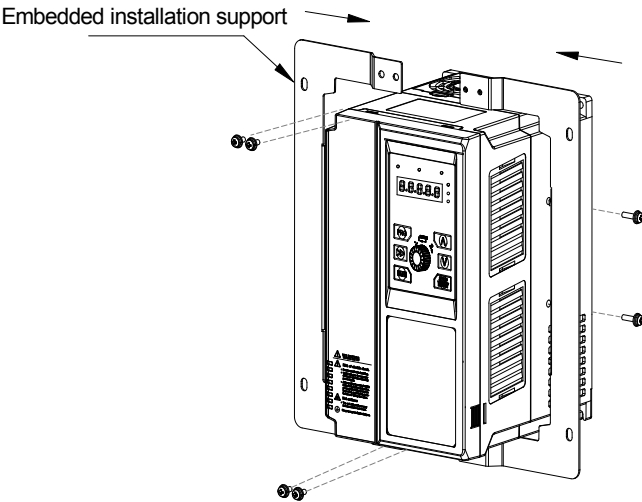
Embedded Support Installation Diagram of Plastic Structure
